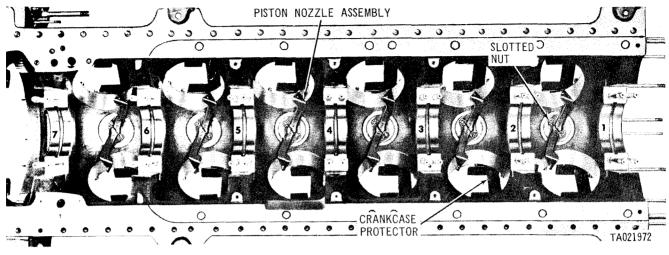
Removing or installing piston oiler nozzle assemblies.
